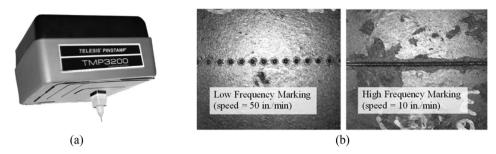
(a) Telesis TMP3200/470 marking head and (b) marked steel surfaces.
